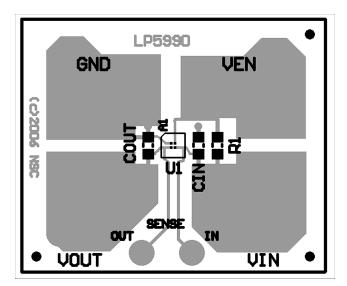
Evaluation Board Component and Pin Layout Board Size:- 1.200" x 1.000"
